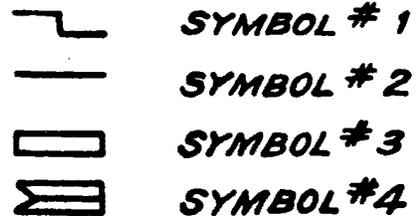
SYMBOLS USED ON RELAY RACK TERMINAL ASSEMBLY DRAWINGS
